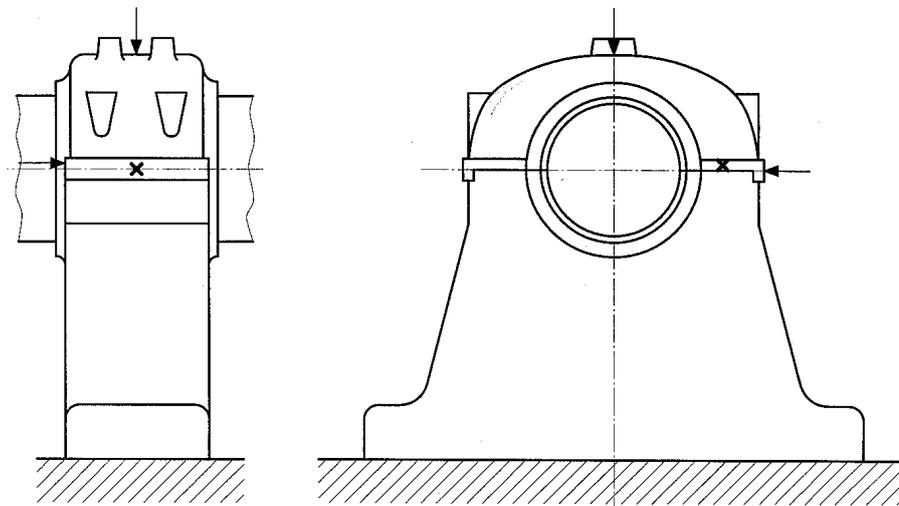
Measurement points for non-rotating parts: bearing pedestal of a turbine
